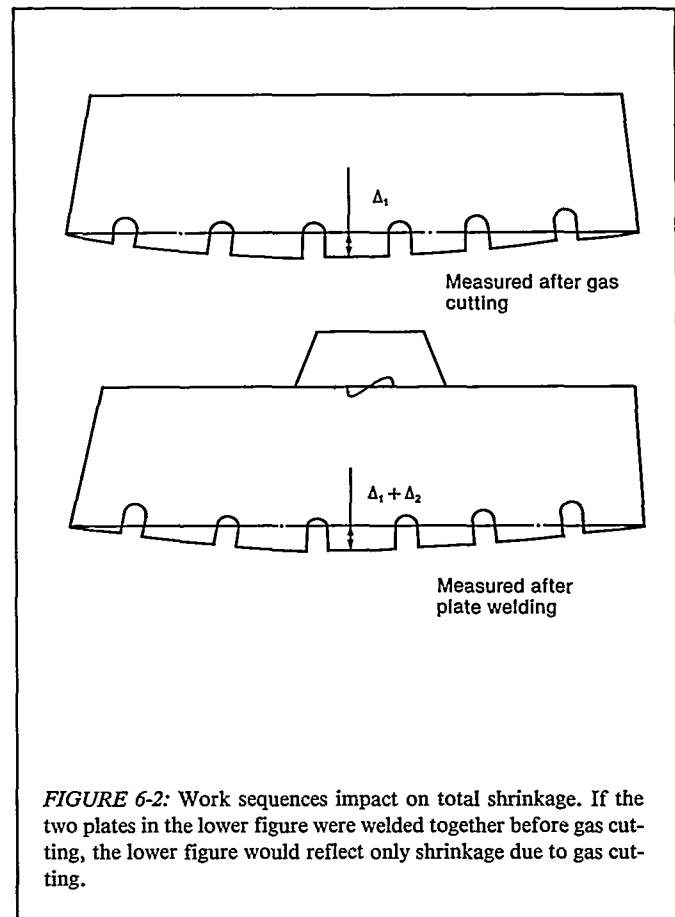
Work sequences impact on total shrinkage. If the two plates in the lower figure were welded together before gas cutting, the lower figure would reflect only shrinkage due to gas cutting.
